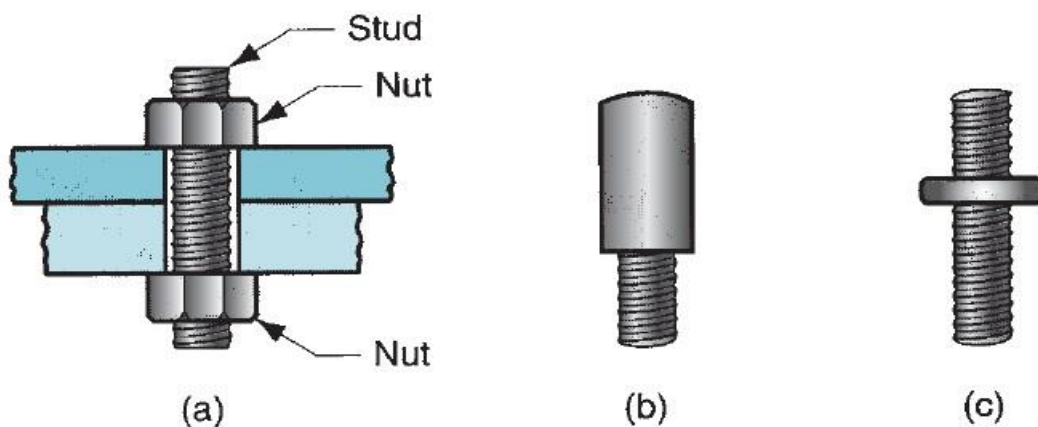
(a) Stud and nuts used for assembly. Other stud types: (b) threads on one end only and (c) double-end stud.
